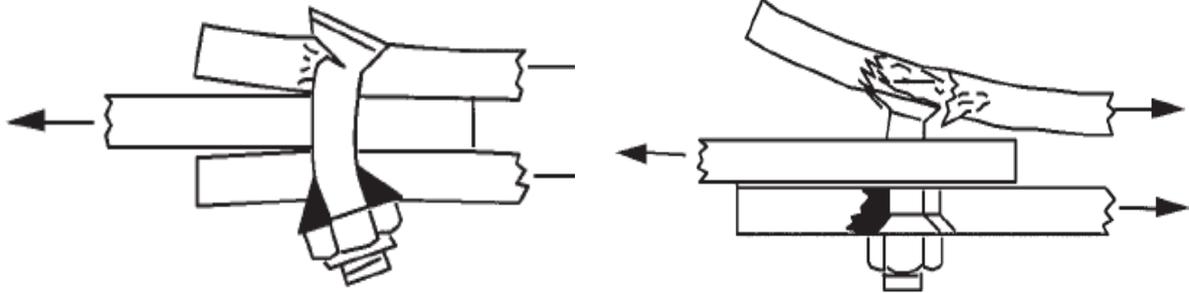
Fastener failure (Campbell, 2010h, p. 451)
